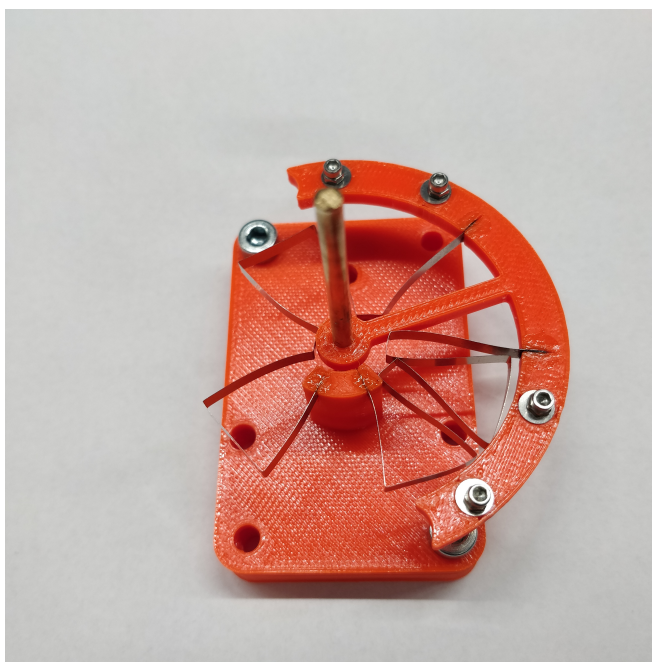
Bending tool used to manufacture the flexure elements used in the proposed sprung rotational harvester.
